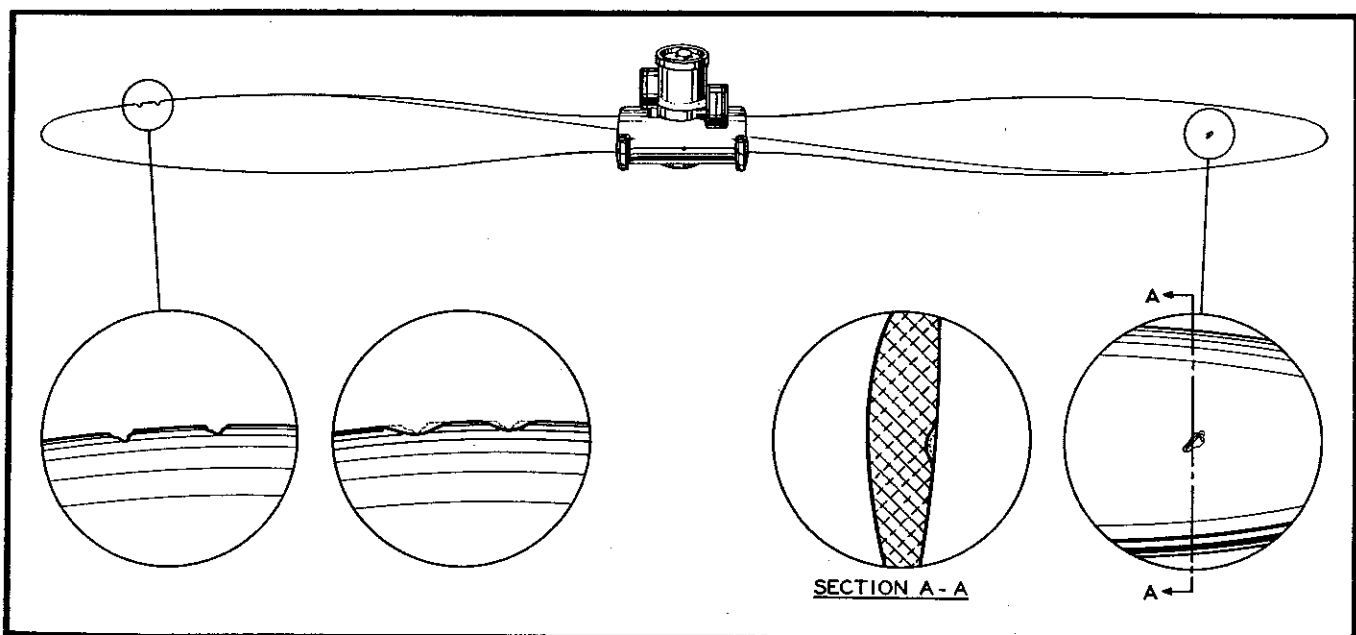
Sketch Showing Typical Nicks in Blades and Method of Removal
